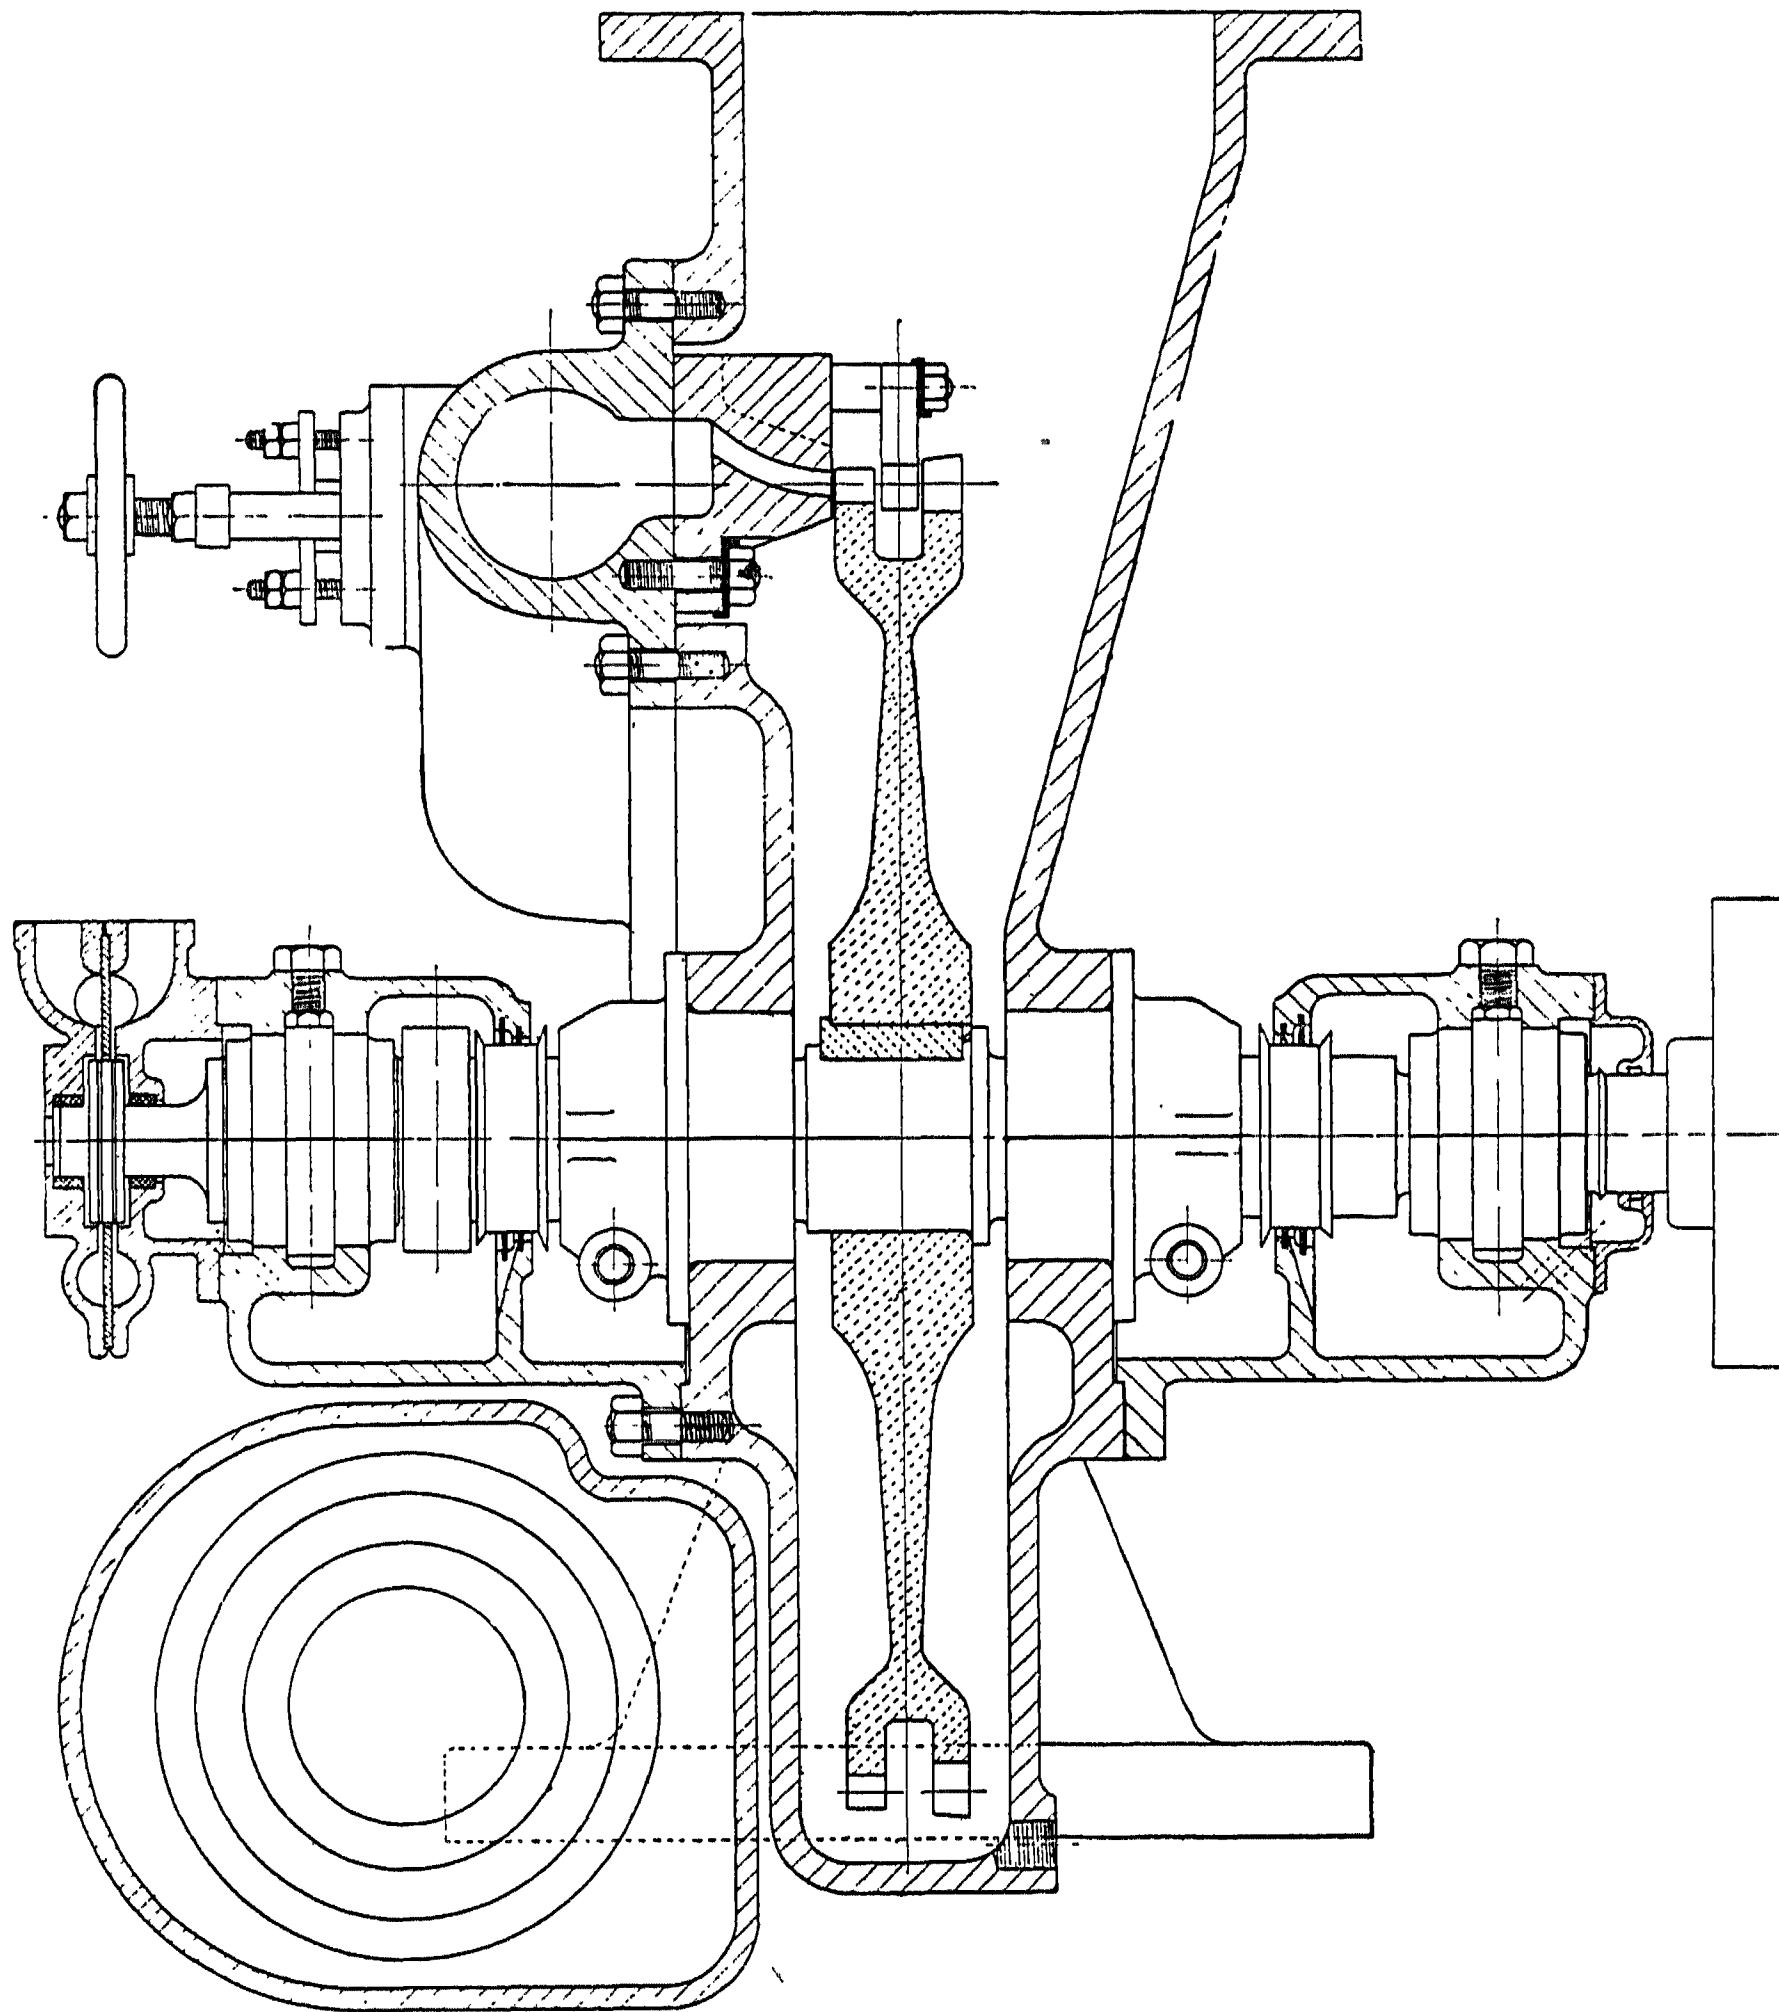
Section through Fraser & Chalmers' Single-stage Back-pressure Steam Turbine
